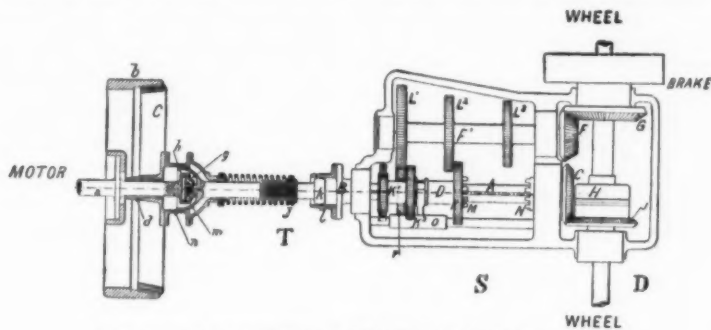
THE CLUTCH AND TRANSMISSION GEAR.
